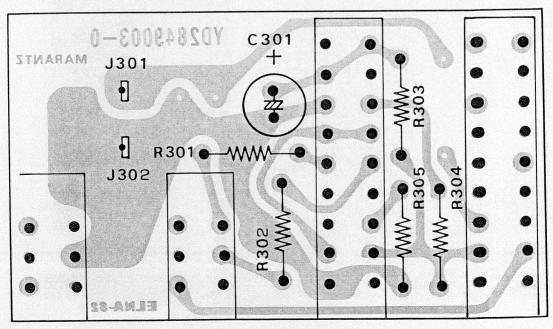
FM, AM, Mono and Muting Switch Assembly P300 Component Locations
